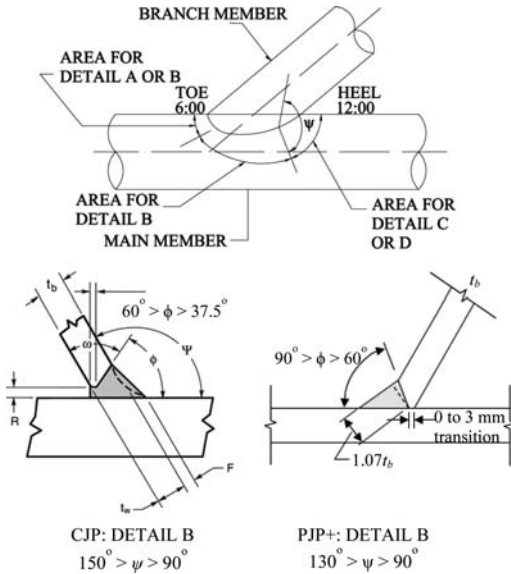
Comparison of the CJP welds and the enhanced partial joint penetration welds.
